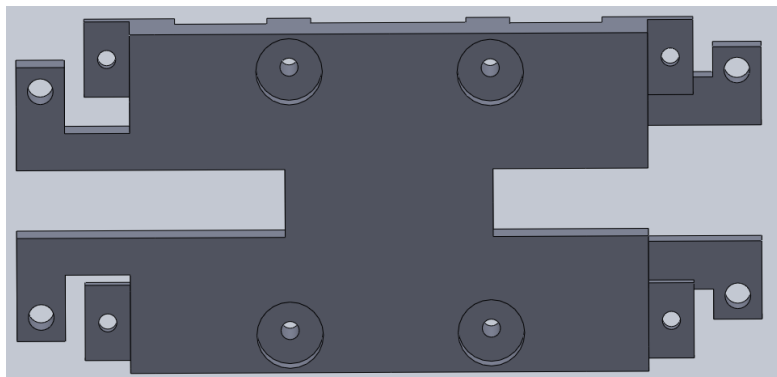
Recesses on Bottom of Motor Fixture for Added Fasteners
